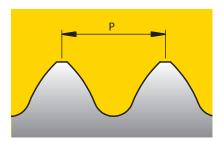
Radius Profile™ thread increases surface contact between screw and nut member.
